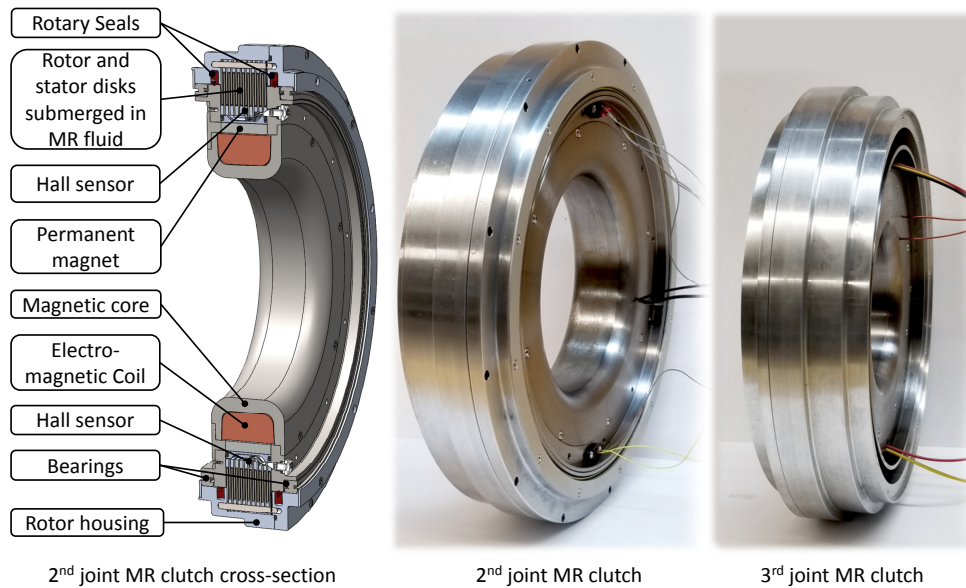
Section view of the 2nd joint MR clutch and a snapshots of MR clutch prototypes for the 2nd and 3rd joints.
